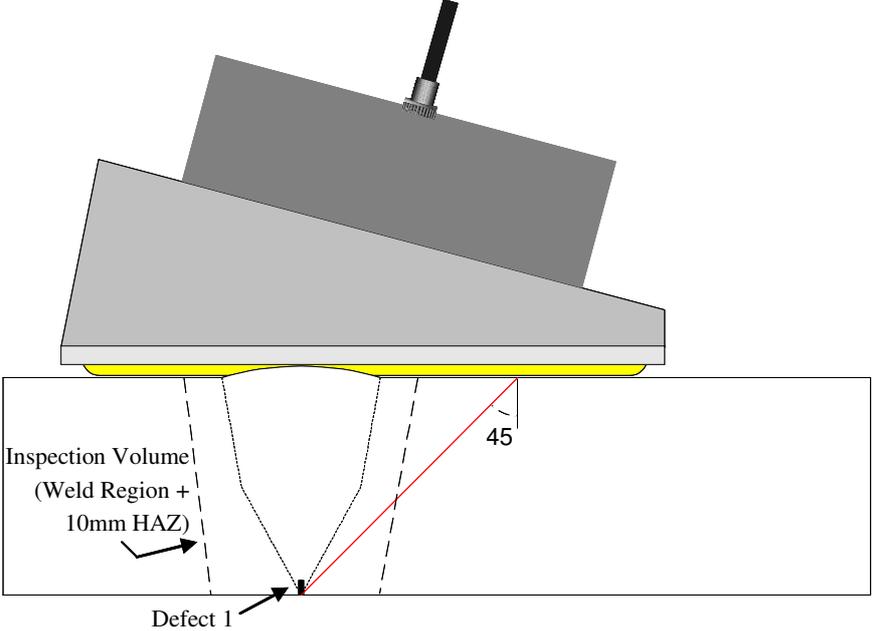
Schematic of pulse-echo shear wave inspection technique of Defect 1 using the membrane coupled phased array device.
